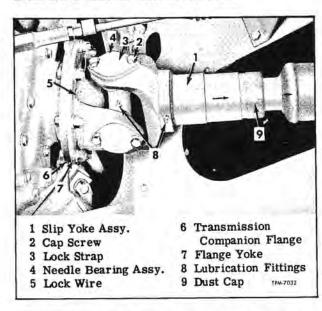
Propeller Shaft Installation at Transmission (SDH and TDH Models)
